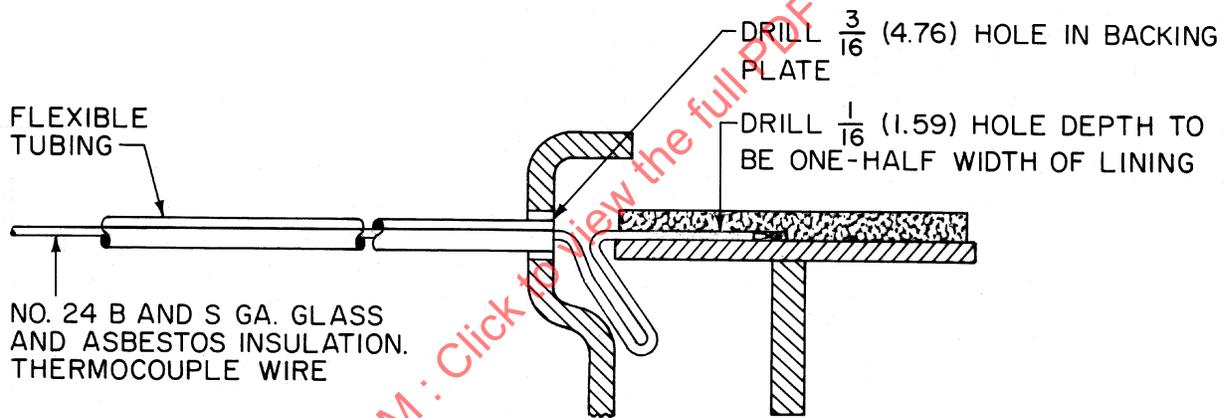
A—DRAWING OF THERMOCOUPLE LOCATION—DRUM BRAKE
